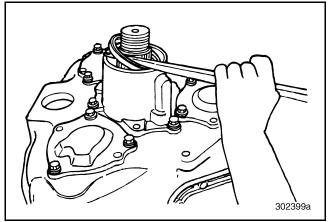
Removing Output Housing Oil Seal for T313L21/T318L21 Series
